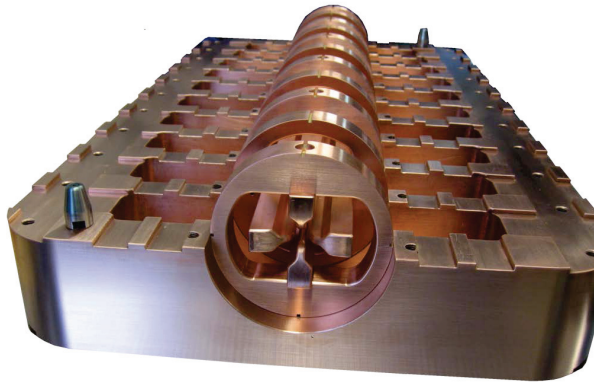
Front view of the Ring-System. The steel-tank and the upper half-shell are removed.
